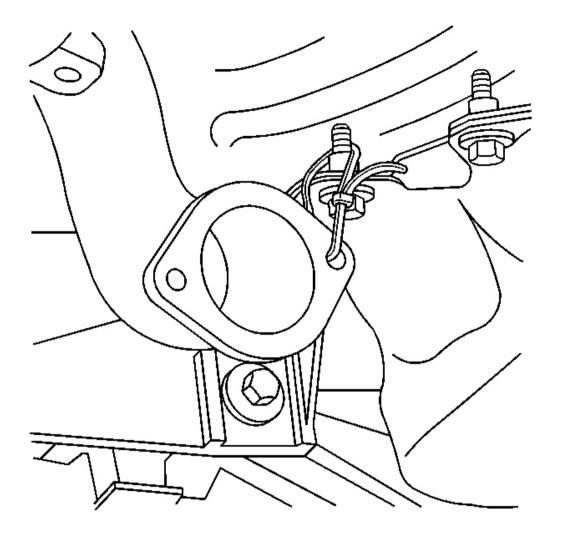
Catalytic Converter Pipe Assembly Courtesy of GENERAL MOTORS CORP.
